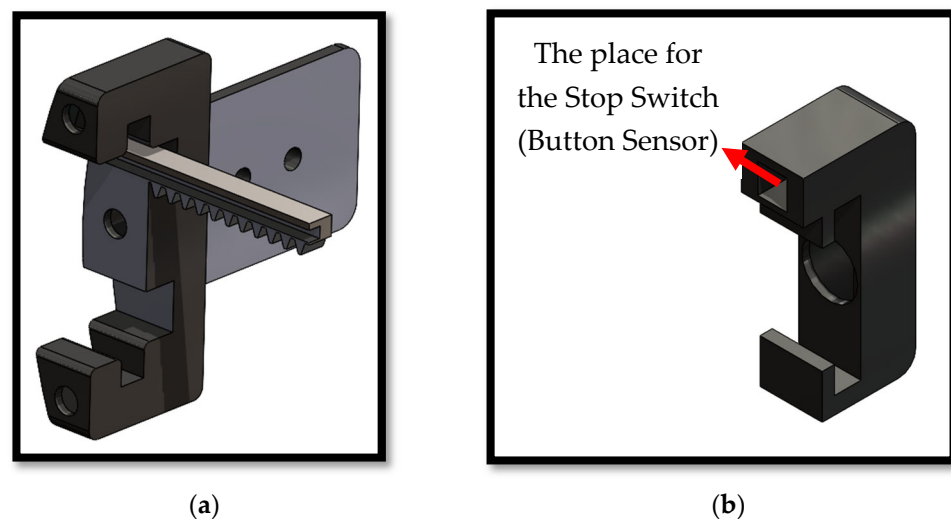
(a) Handle which holds the hard shell and actuates the gripping mechanism through the rack on it and (b) rubber stop, which is a mechanical stop printed out of TPU that prevents the handle and rack from moving off the body of the gripper.
